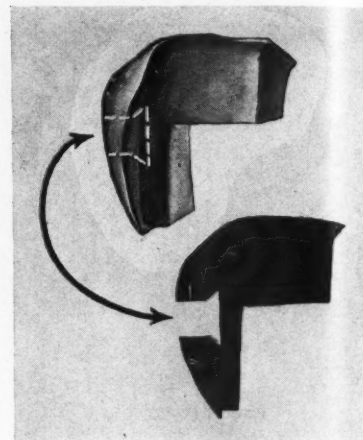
Undercut in deepest part of hole to complete stress-opening in attachment.
